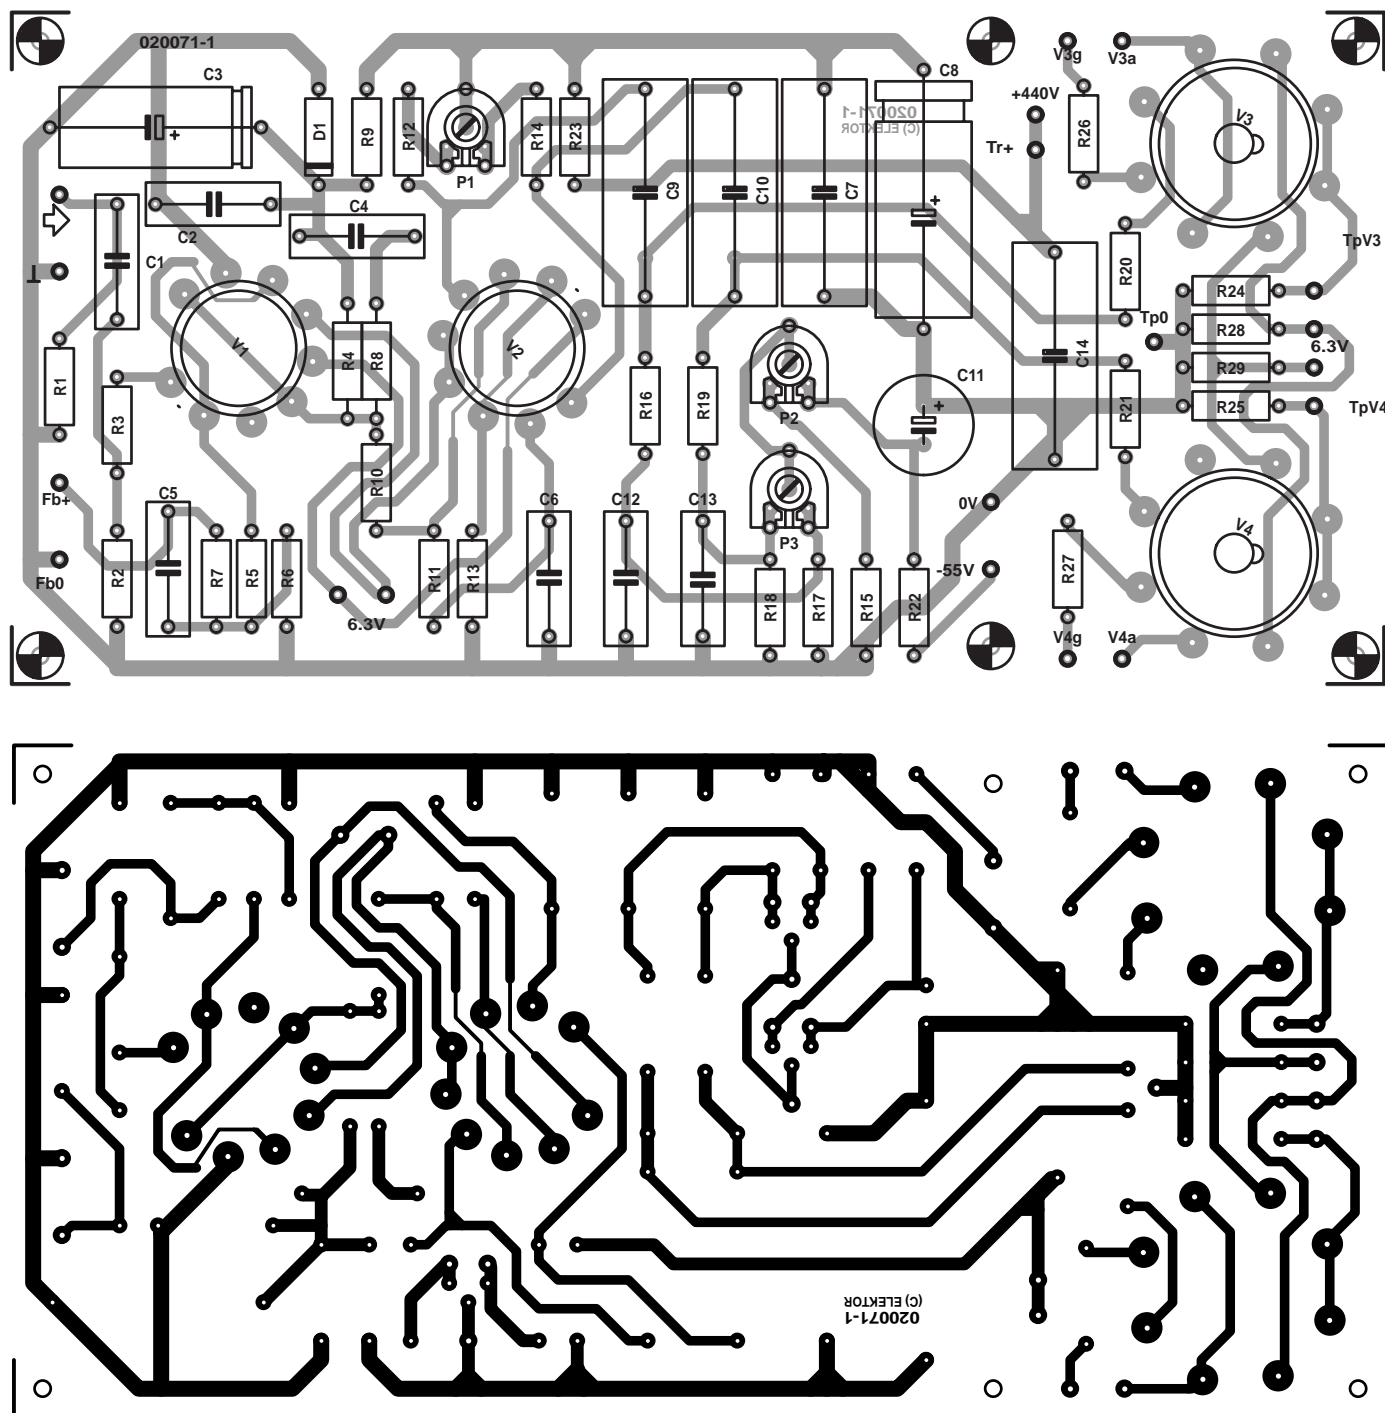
Copper layout and component layout of the printed circuit board for one amplifier channel.
